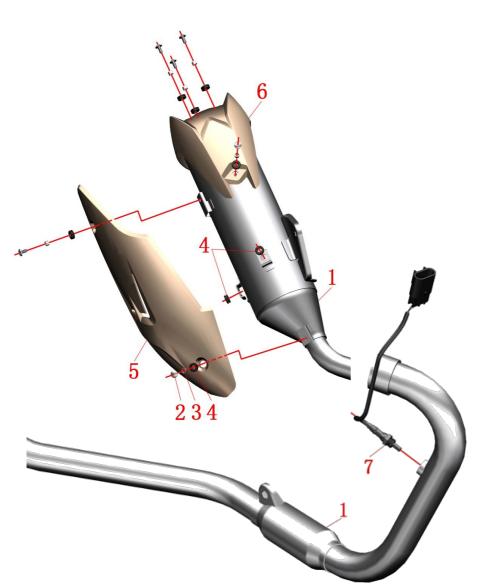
MUFFLER COMPONENT		Muffler component	CHK	(0)
